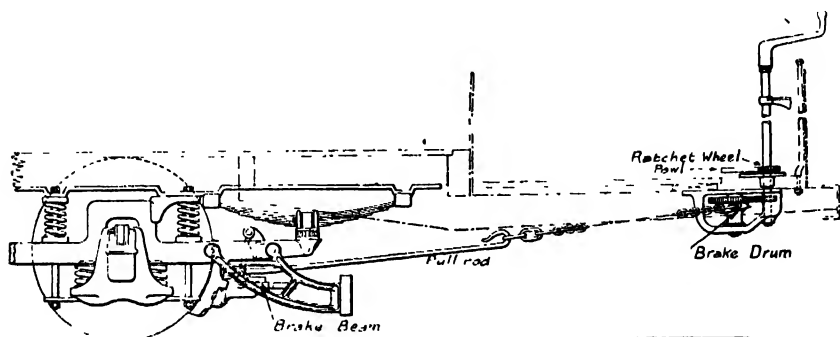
Arrangement of Platform Gear for Wheel Brake on Single-truck Car.
